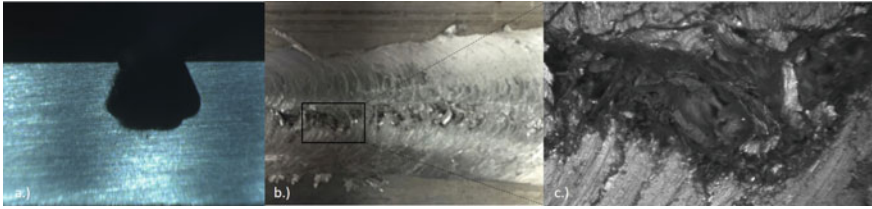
O-ring groove results. a Full o-ring groove shape. b Surface finish of FSE joint with non consolidated material. c Magnified image of voids showing chunks of aluminum that have not been consolidated by the shoulder
